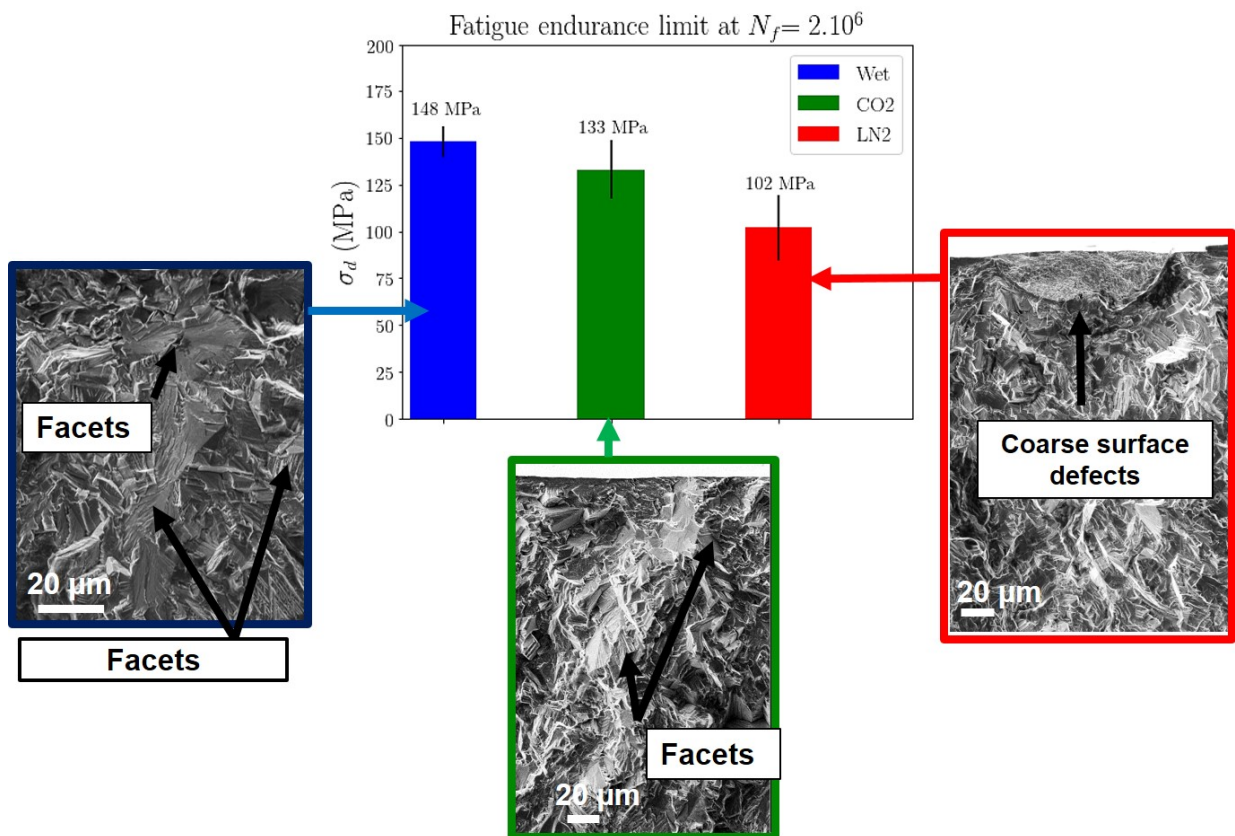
Illustration of the fatigue endurance limit obtained for the three fatigue batches linked with the fatigue failure mechanisms observed in the surface fracture.
